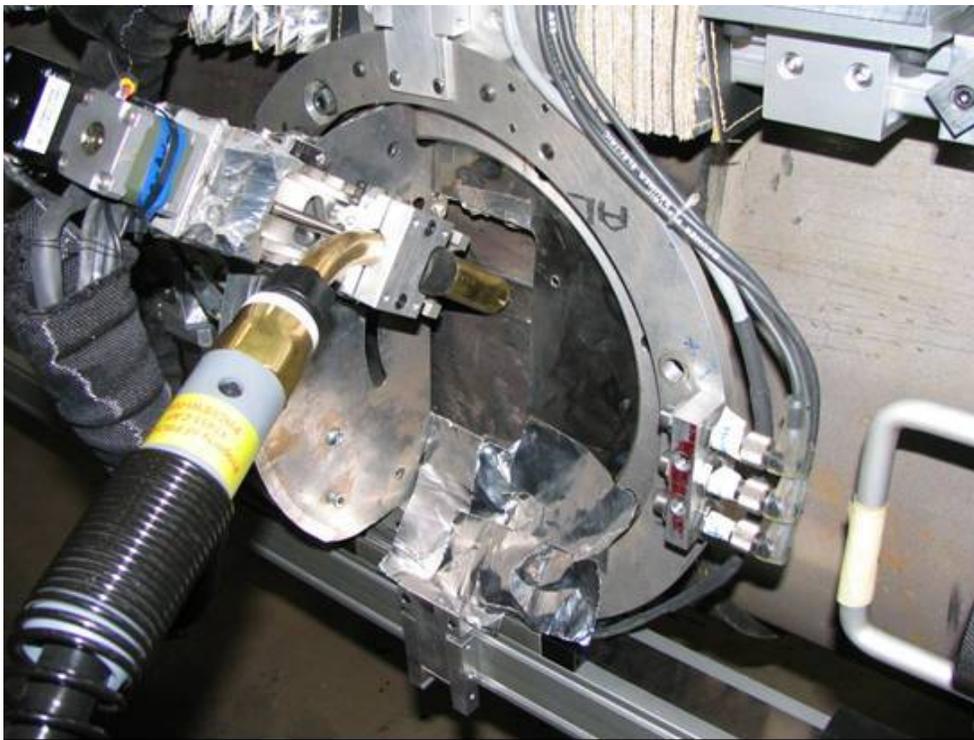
System before V-Groove Weld on Pressure-Containing Sleeve (View 2)
